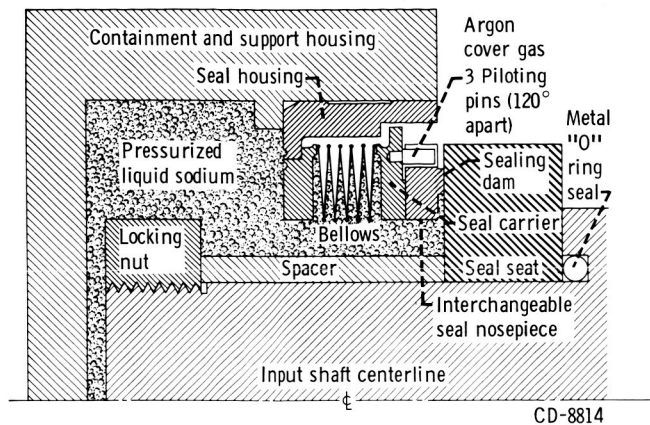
Schematic diagram of face contact seal assembly and experimental apparatus.
